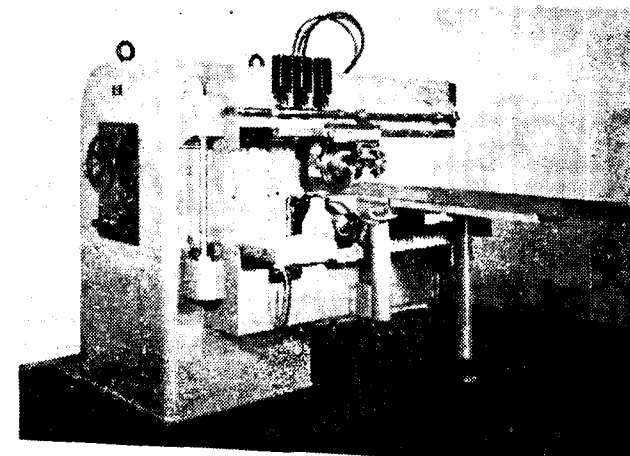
Semi-portal foil butt seam welding machine.
